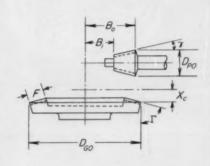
Precision 5:150 combination with 31-in. gear OD, 1.98-in. pinion OD, and 4.50-in. shaft offset for a machine-tool drive.
